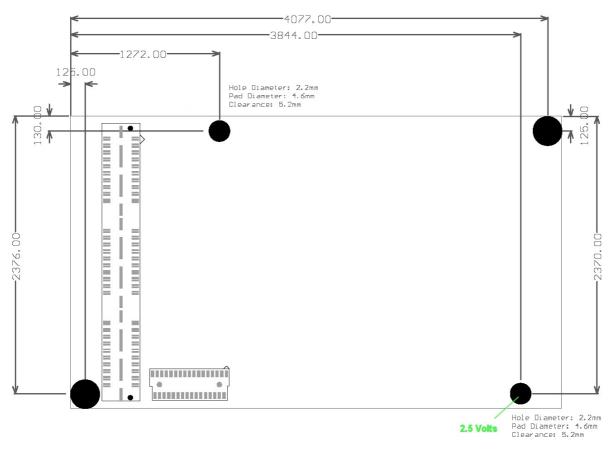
Main/Base Module - Top View – Mounting Hole Location
